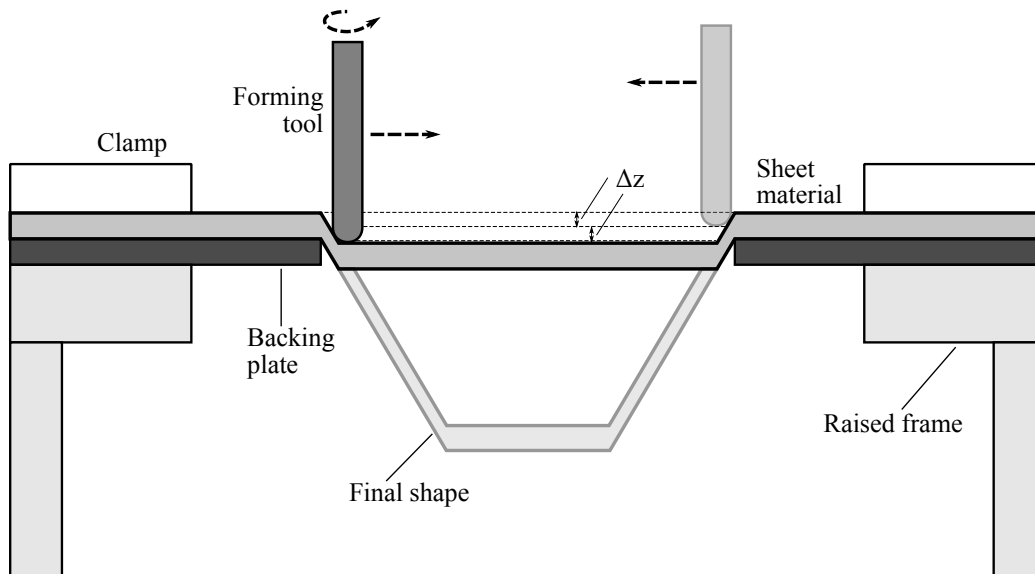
The initial tool movement of forming a part from a flat sheet with SPIF.
